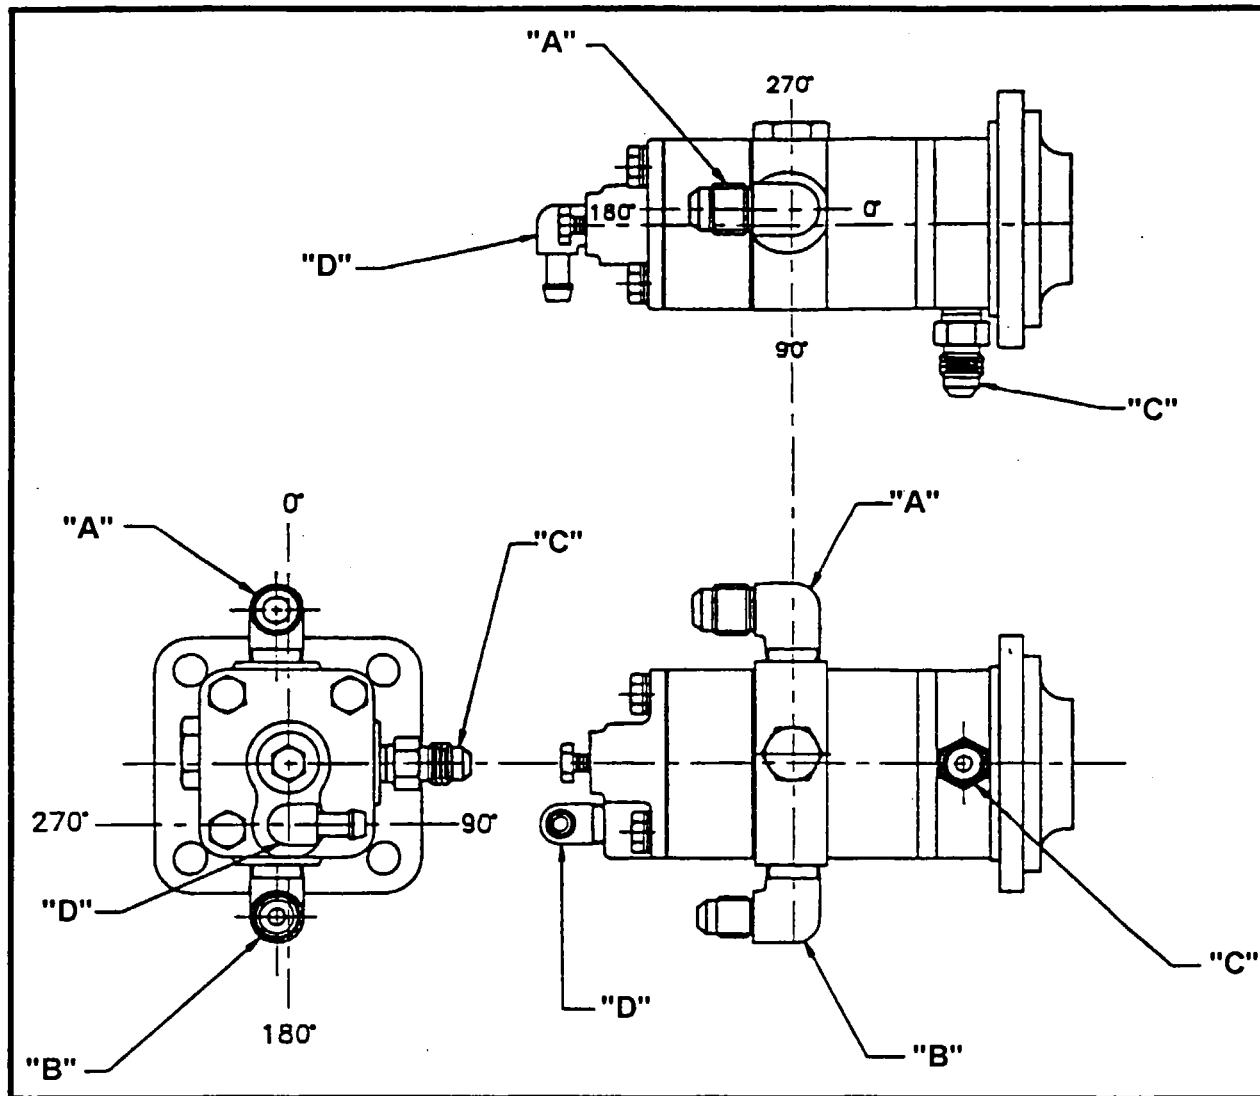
FUEL PUMP FITTING LOCATIONS
